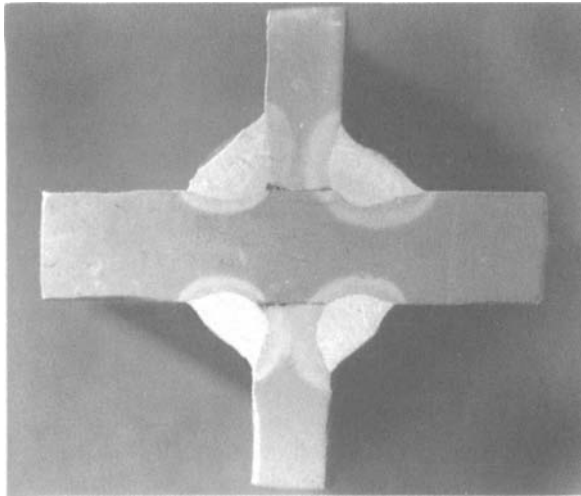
Polished and Etched Longitudinal Section of Specimen
